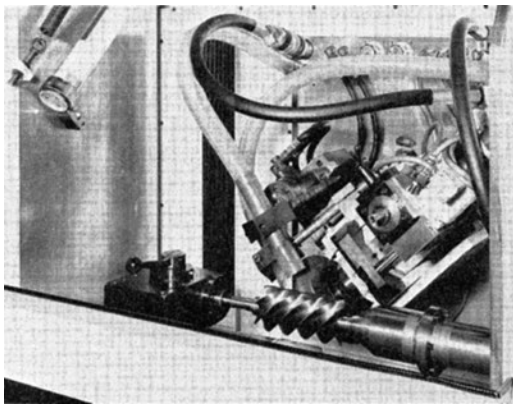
Form grinding a helical gear part. (Courtesy of Kapp Co., Coburg, German Federal Republic.)
